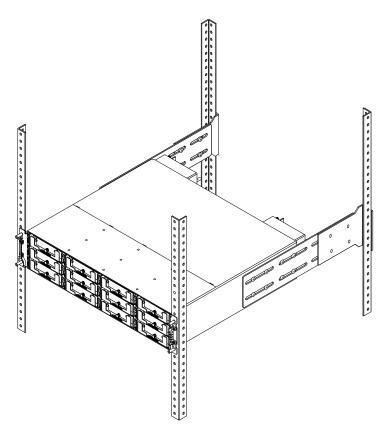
Rackmounted Cabinet Array With Chassis Ears and Bezels Removed, After Installation
